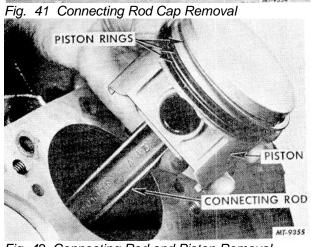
Connecting Rod and Piston Removal CRANKSHAFT PULLEY
